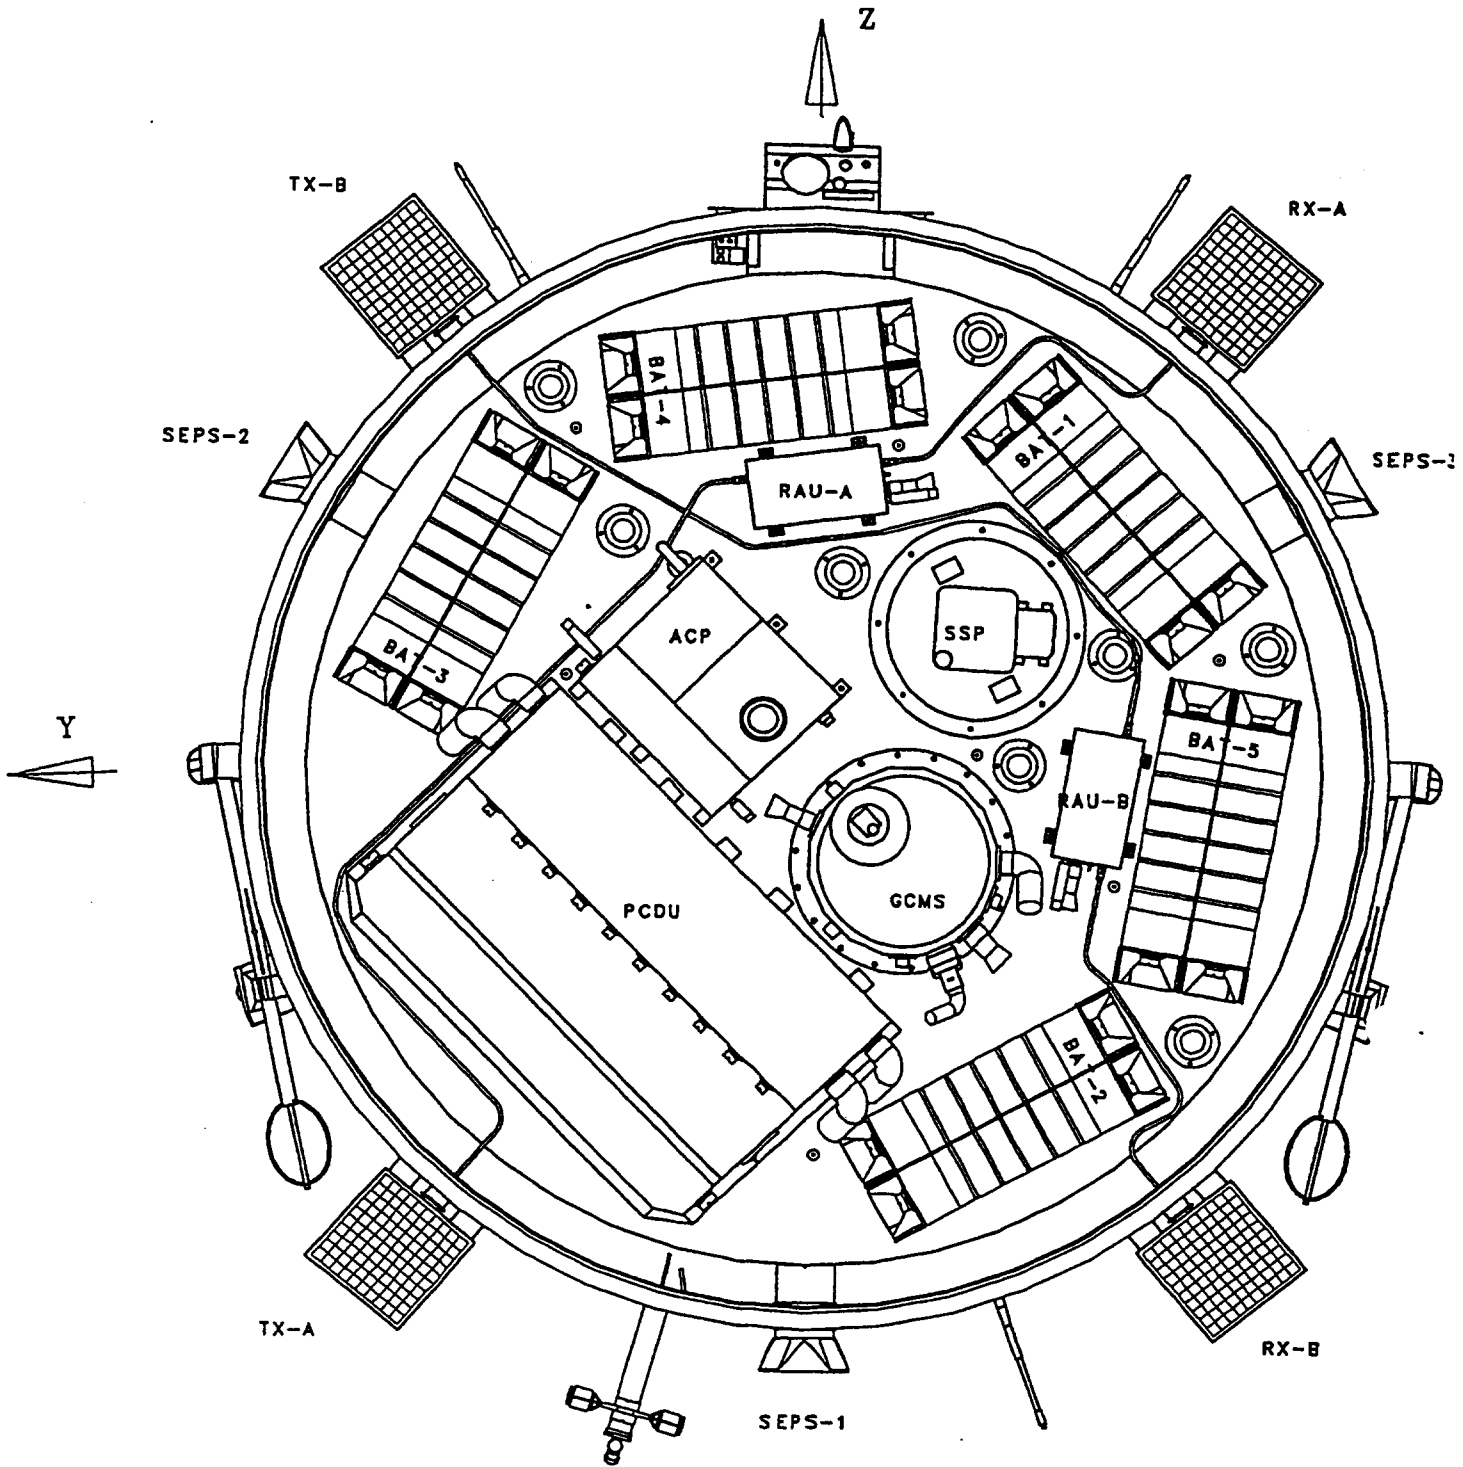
EXPERIMENT PLATFORM LAYOUT (BOTTOM SIDE)
